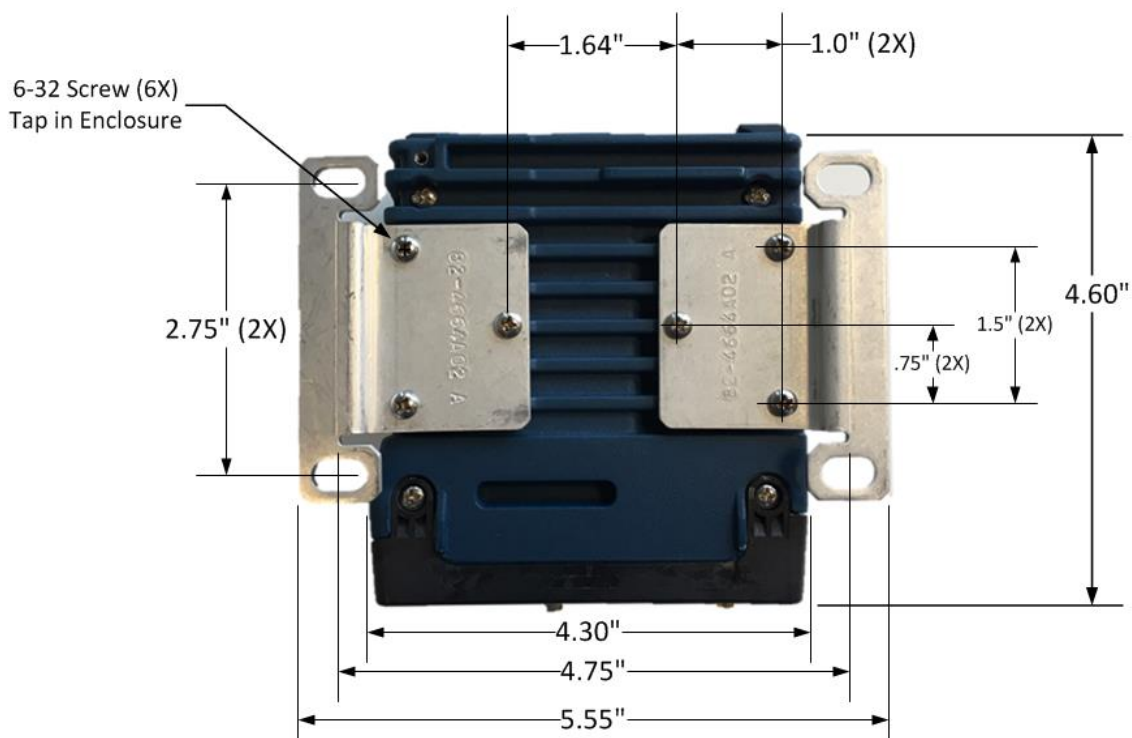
ECR Flat Mounting Bracket Dimensions
